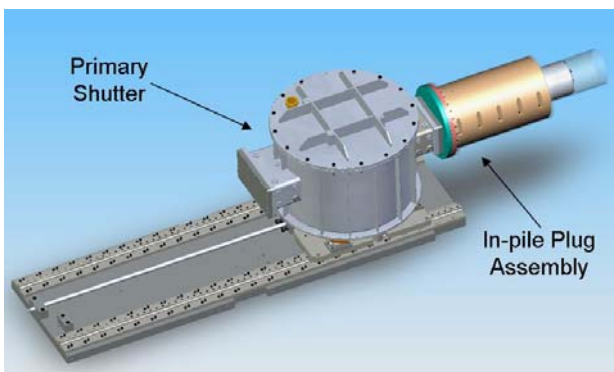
The design of the in-pile plug assembly and the primary shutter
